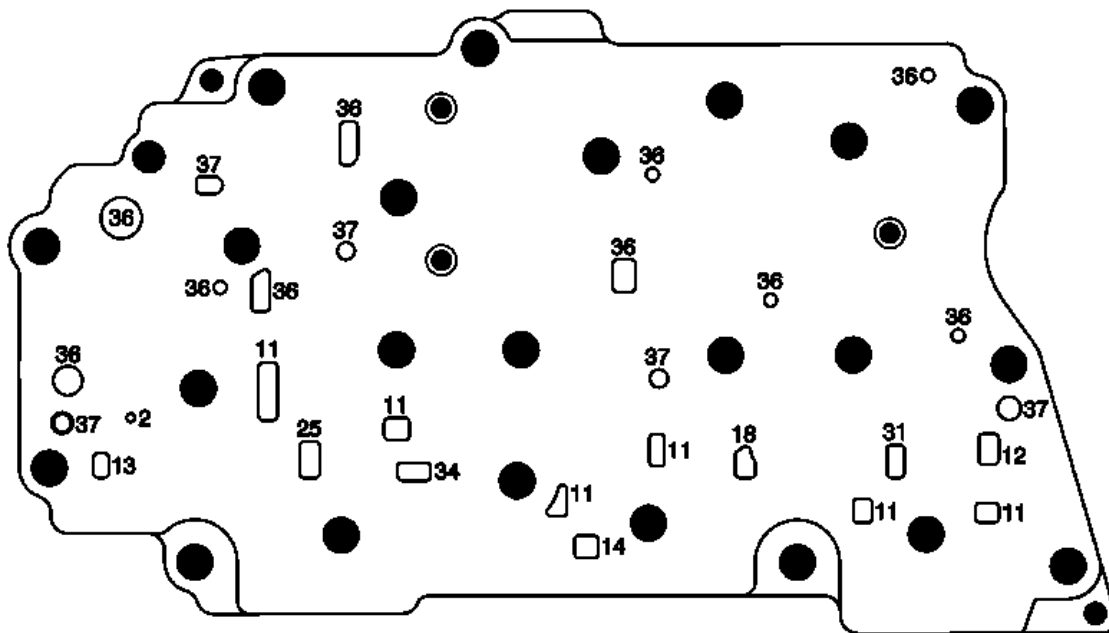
Channel Plate -- Control Solenoid (w/Body and TCM) Valve Assembly Side
